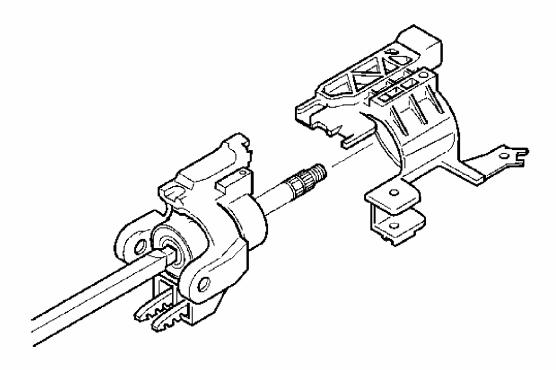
View Of Turn Signal Switch Housing & Steering Column Shaft Assembly Courtesy of GENERAL MOTORS CORP.
